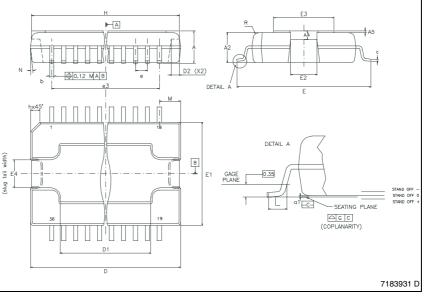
Flexiwatt27 (SMD) mechanical data and package dimensions
